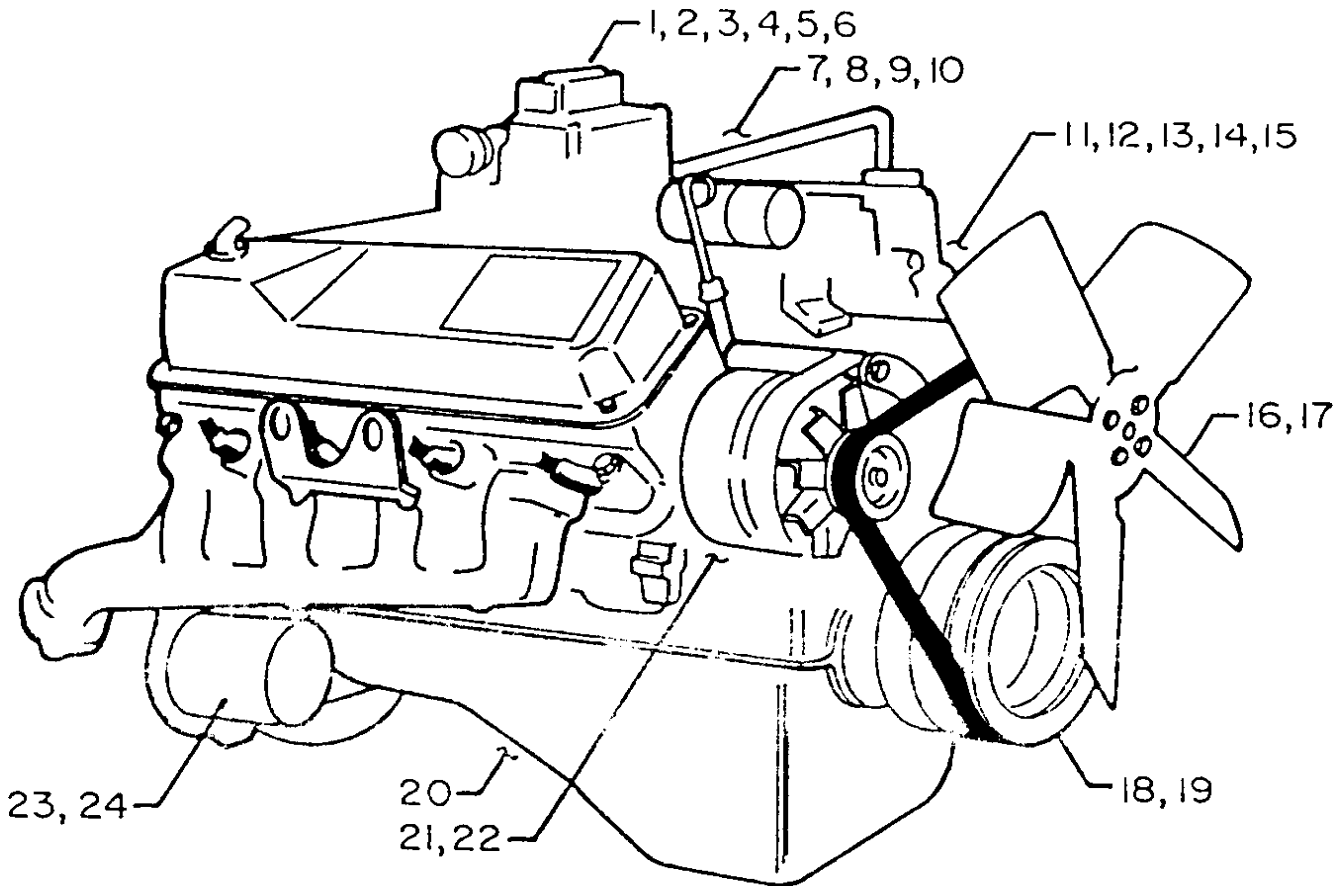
ENGINE ACCESSORIES (70732274)
